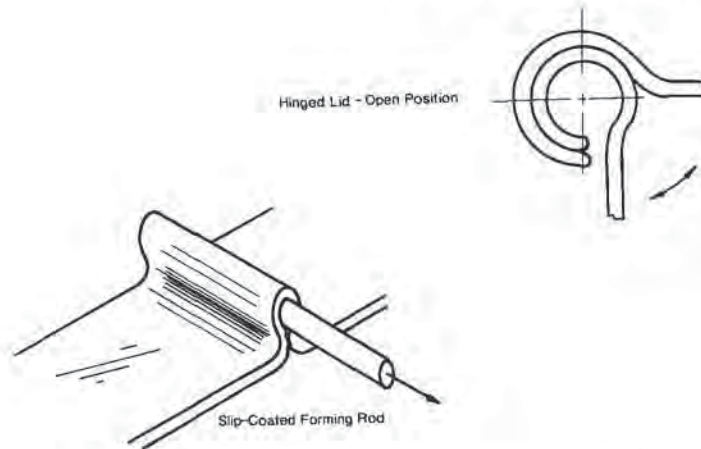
(Left) For pin hinges, mold around forming rod; (right) for nested hinge lid, mold both pieces around forming rods
